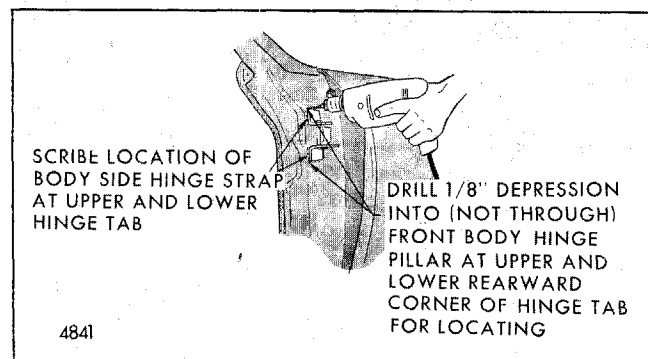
Body Side Door Hinge Strap Removal - "H" Styles
